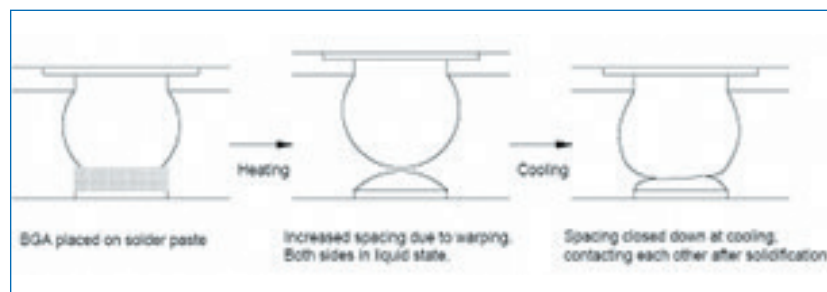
Diagram representing one cause of HiP defects. As the solder melts, the land pad and BGA ball disengage. After the solder starts cooling, they make contact again, yet do not form a bond.⁷
